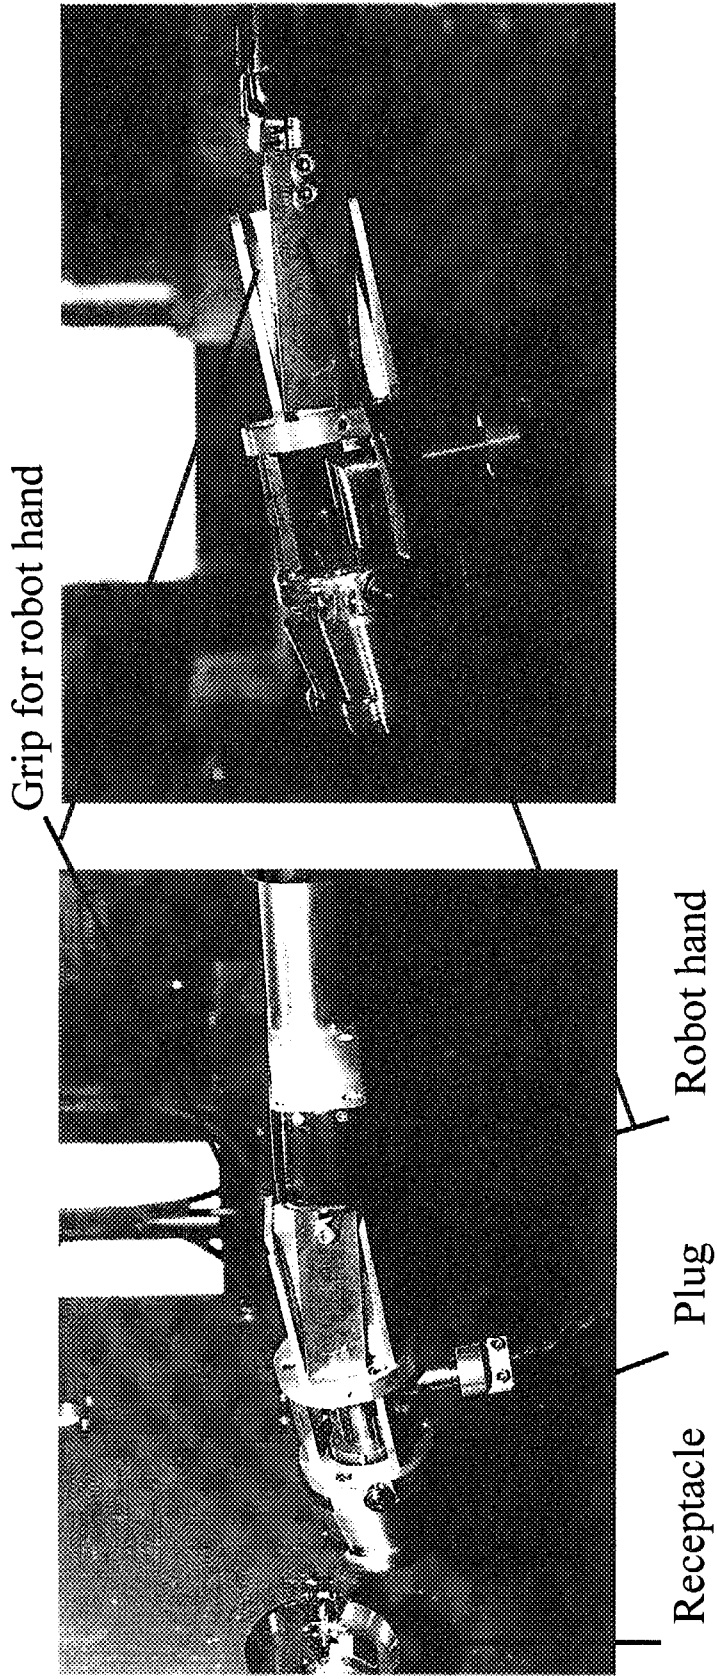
View of plug inclination caused by clearance between the robot hand and the grip for robot hand
